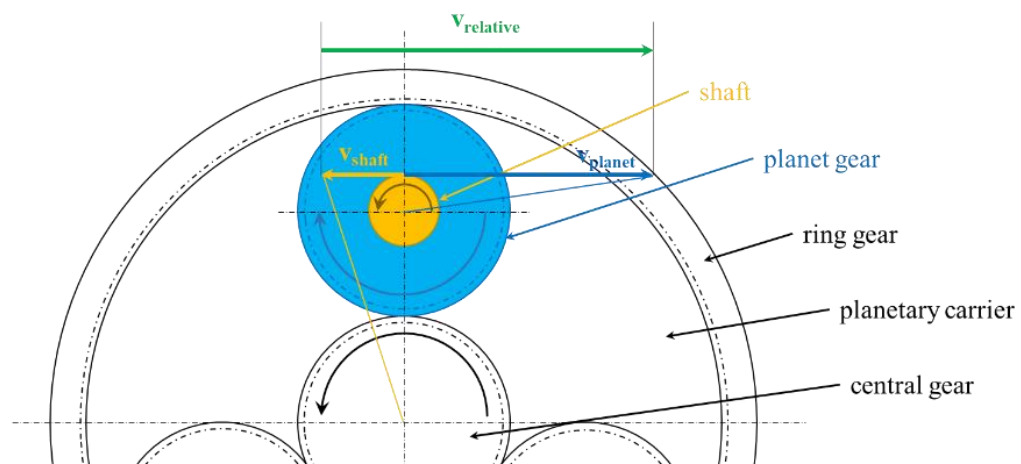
Velocity ratios in a planetary gear with stationary ring gear and driving central gear
